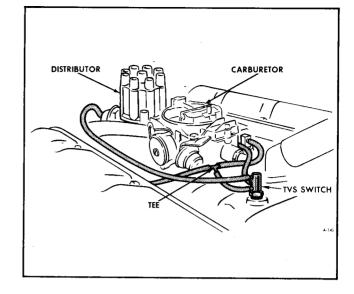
Distributor and Transmission Vacuum Lines (Typical)
